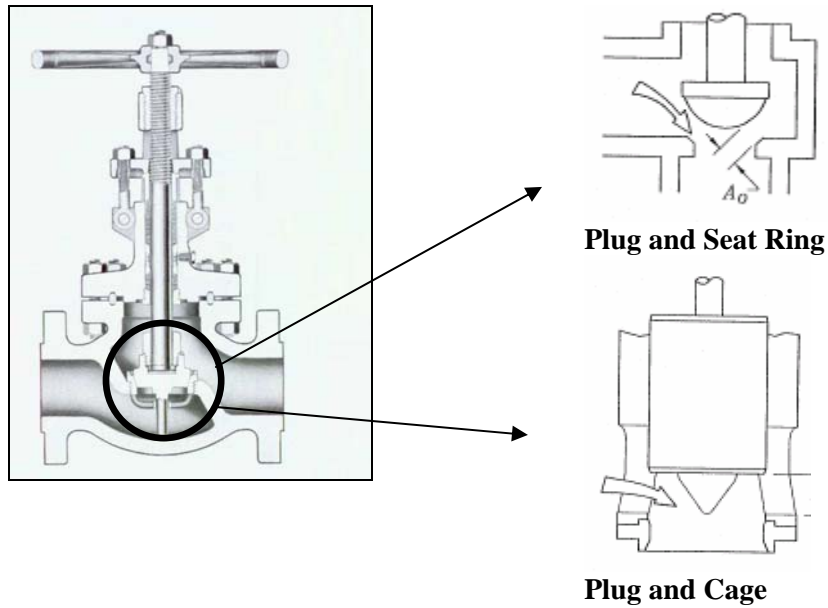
Basic Globe Valve Design with Possible Types of Valve Throat Configurations
